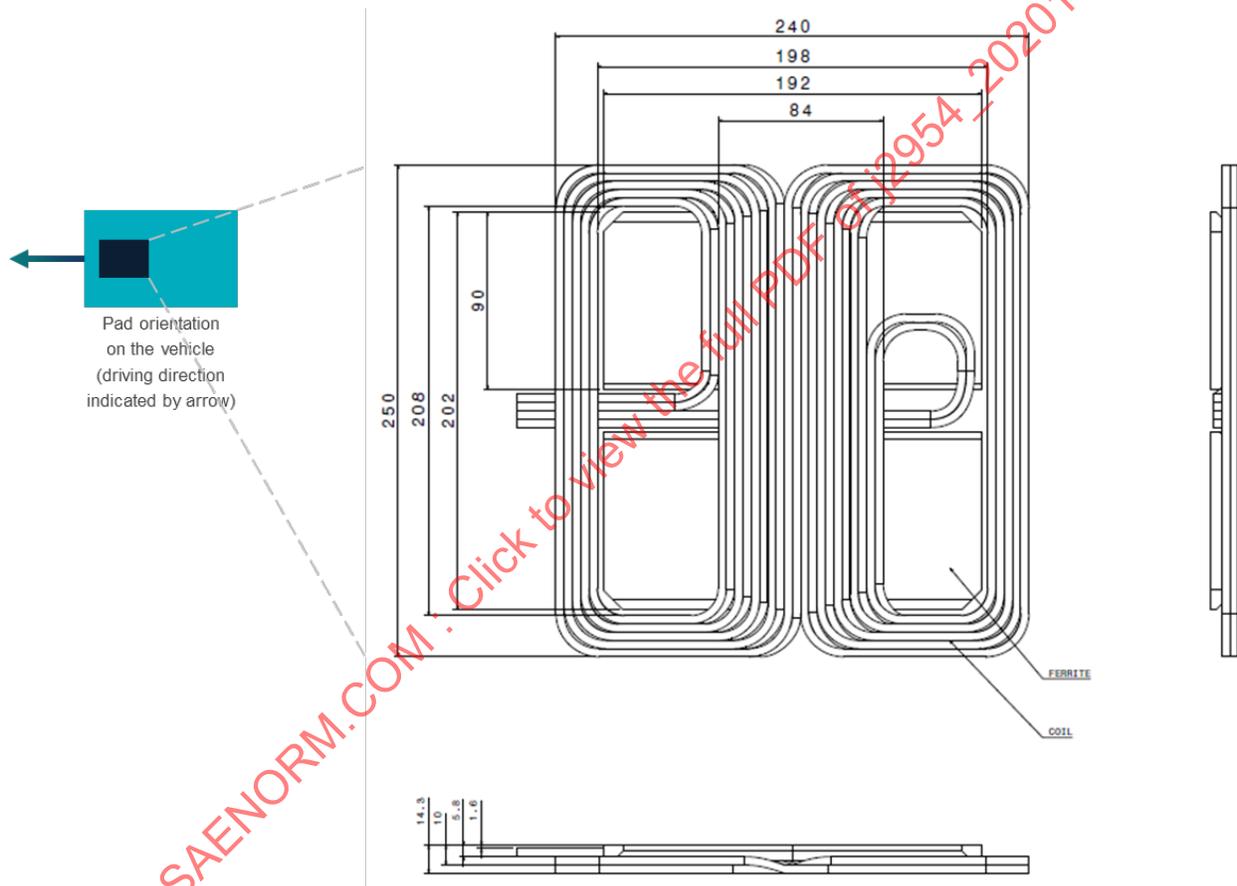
Mechanical dimensions of the Product VA WPT2/Z1
